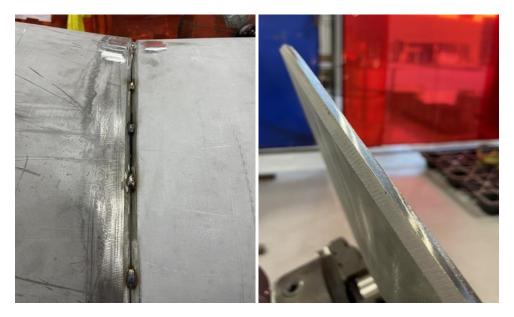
(Left) Image of a single-vee joint design and (right) image of a double-vee joint design.
